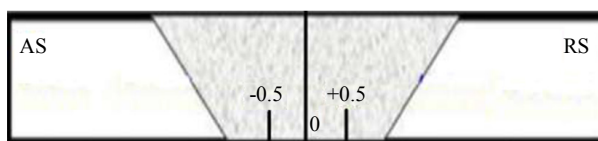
Schematic view of the cross-section of the welded sample
